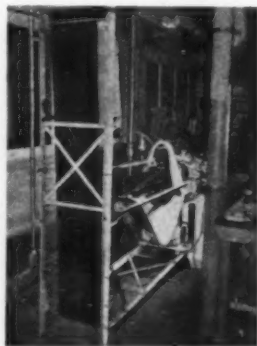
Film with scarfed edges feeds down through floating take-up roll on the end of a hinged frame near the floor—and then over another roll into tube-making machine in the background.
